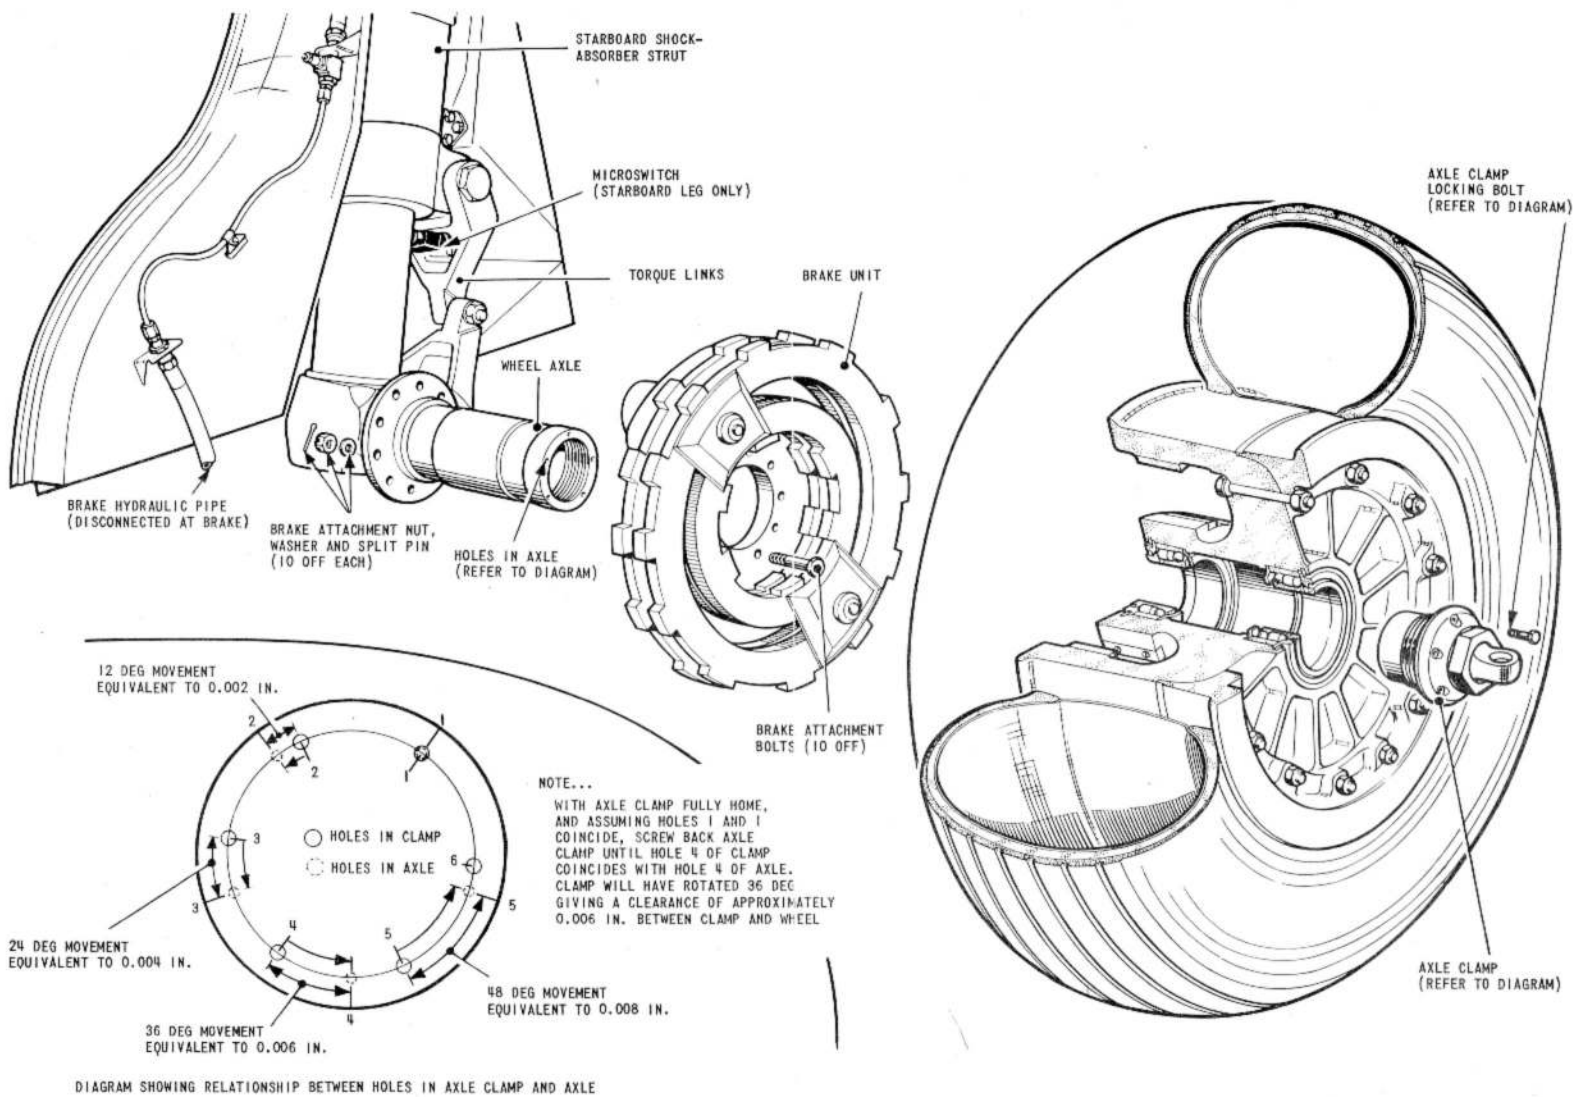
WHEEL AND BRAKE REMOVAL AND ASSEMBLY
